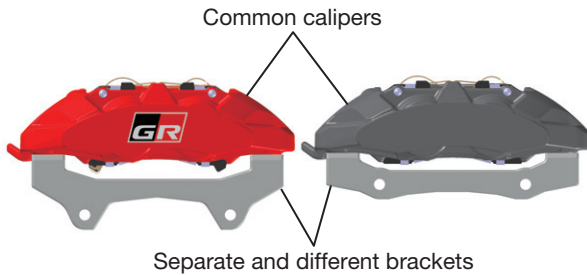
Standard Front Caliper Configuration (Left) and Configuration for Smaller Wheels (Right)
